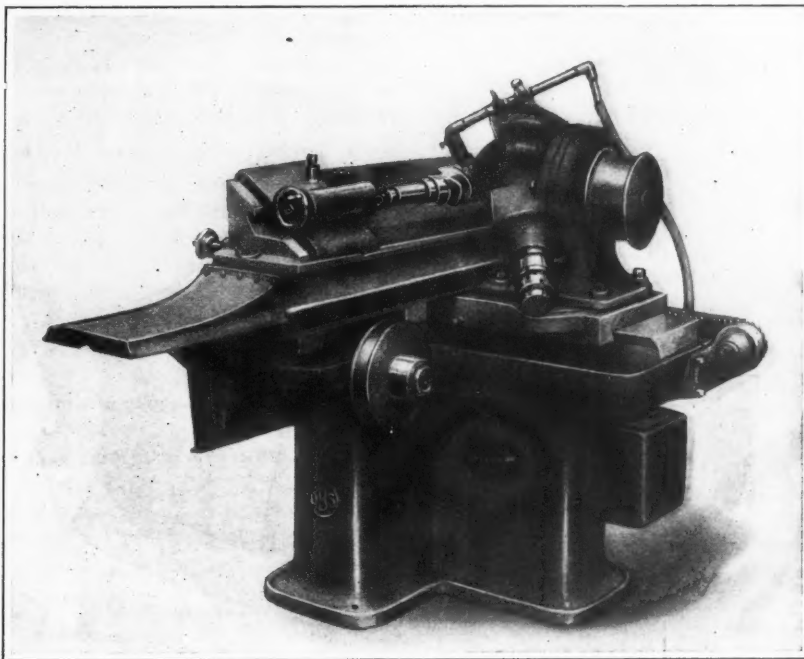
Rear View of Worm Grinder, showing Work, Single Pulley Drive, and Arrangement of Wheel Head
